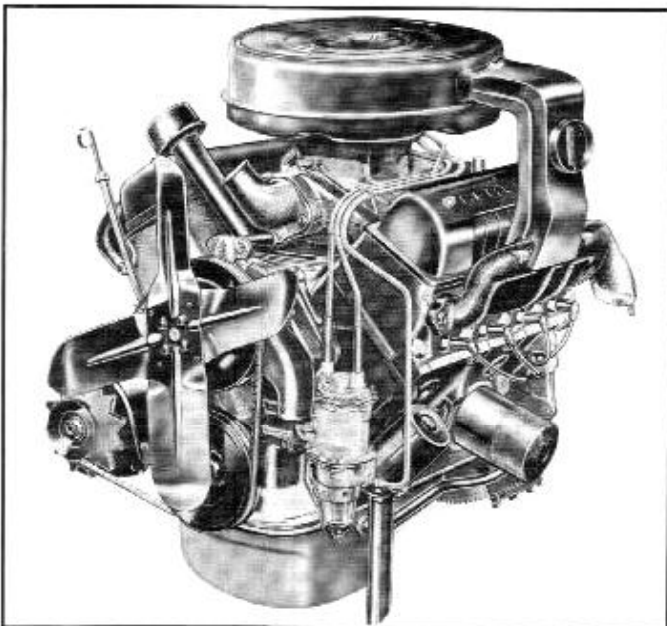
A-1—Left Front 3/4 View—312 Cubic Inch Engine
